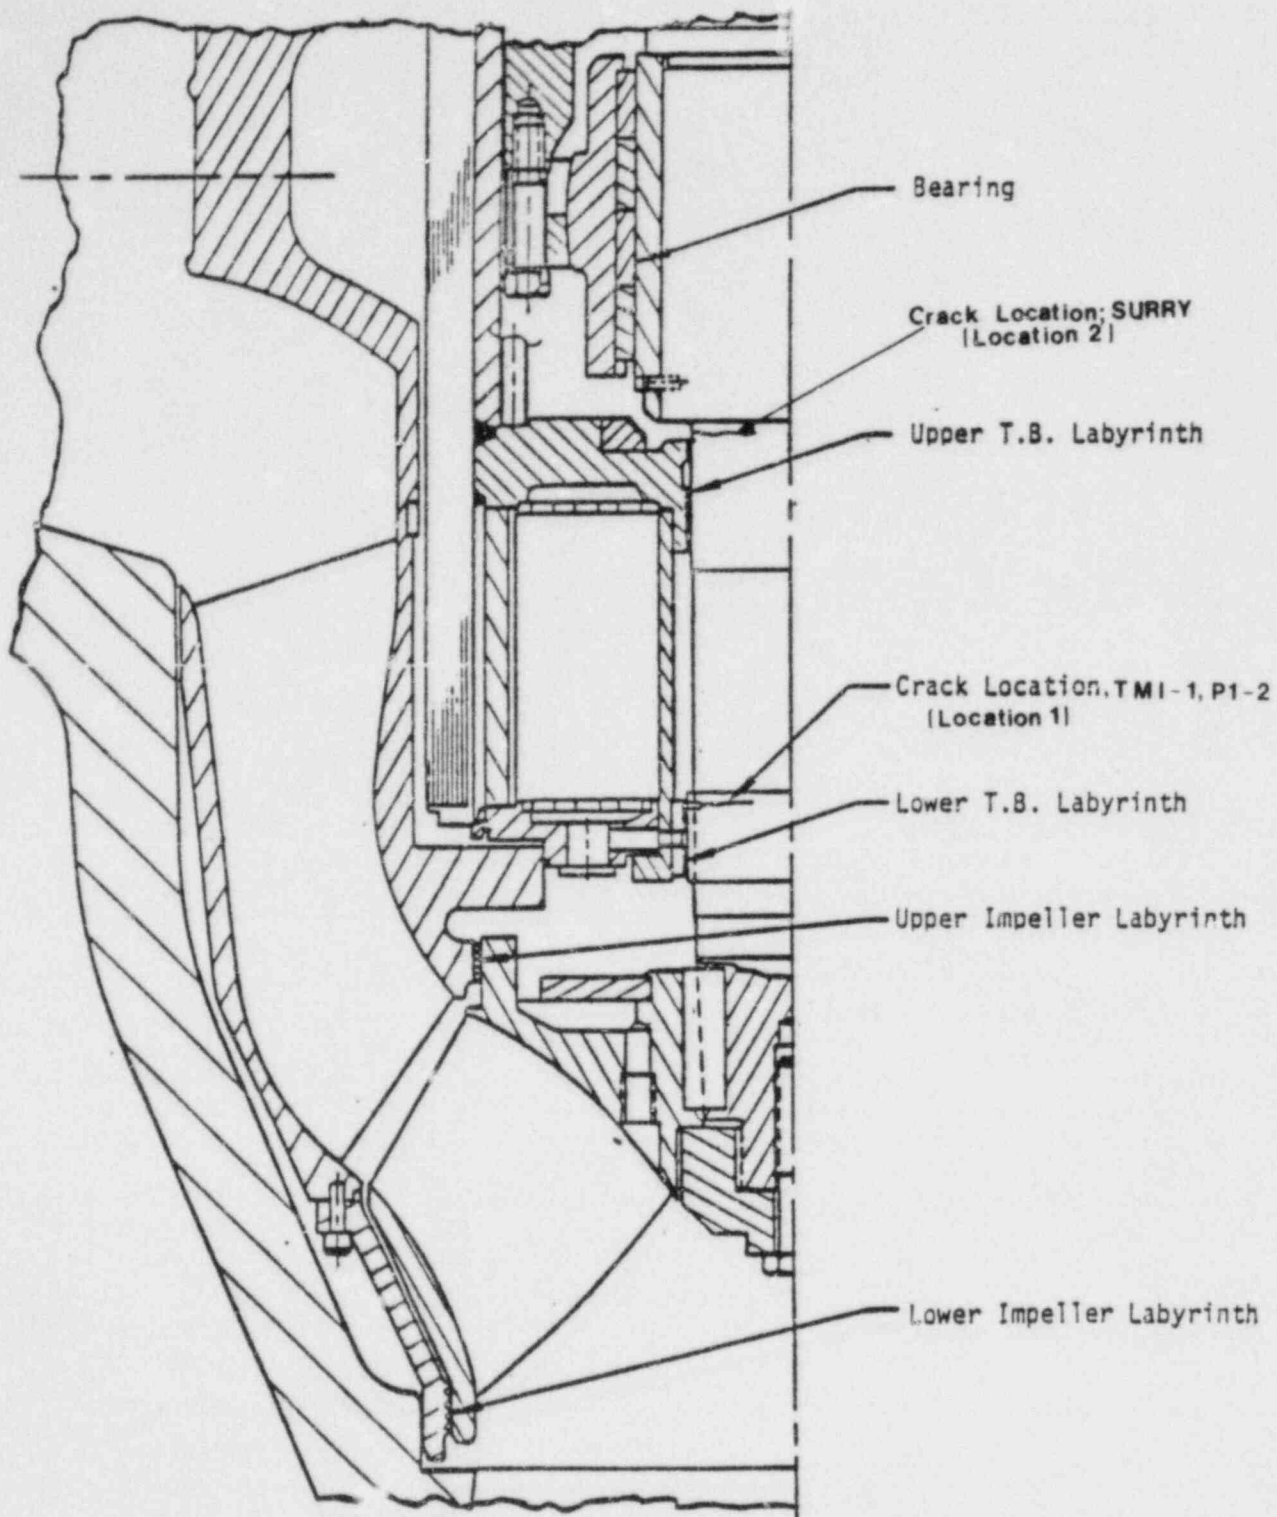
Enlarged Section View of Pump in Failure Area
